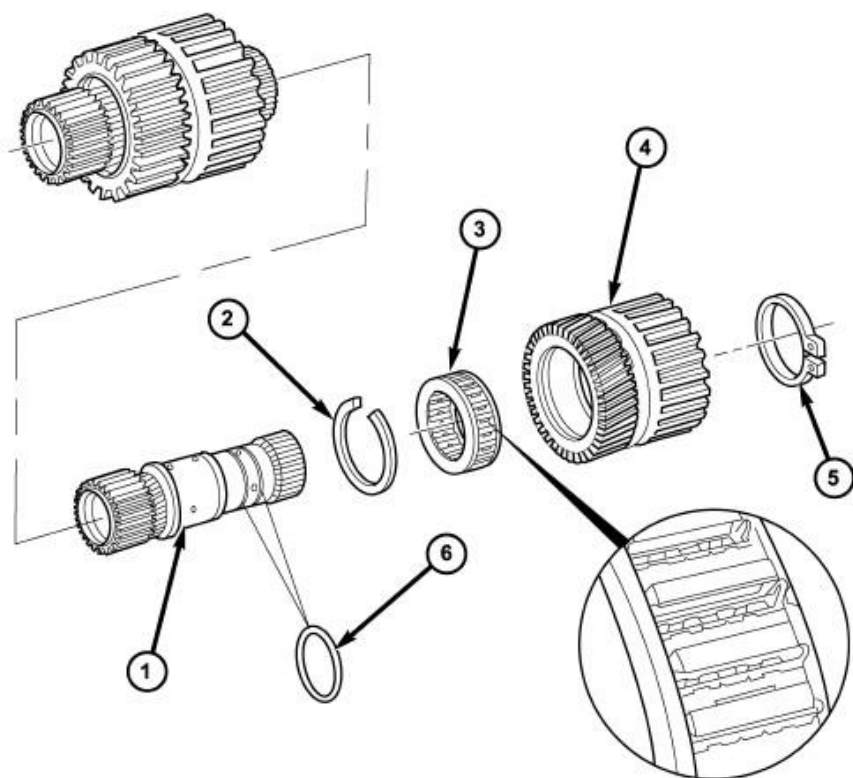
Freewheeling Clutch F2 Anti-Friction Bearing
